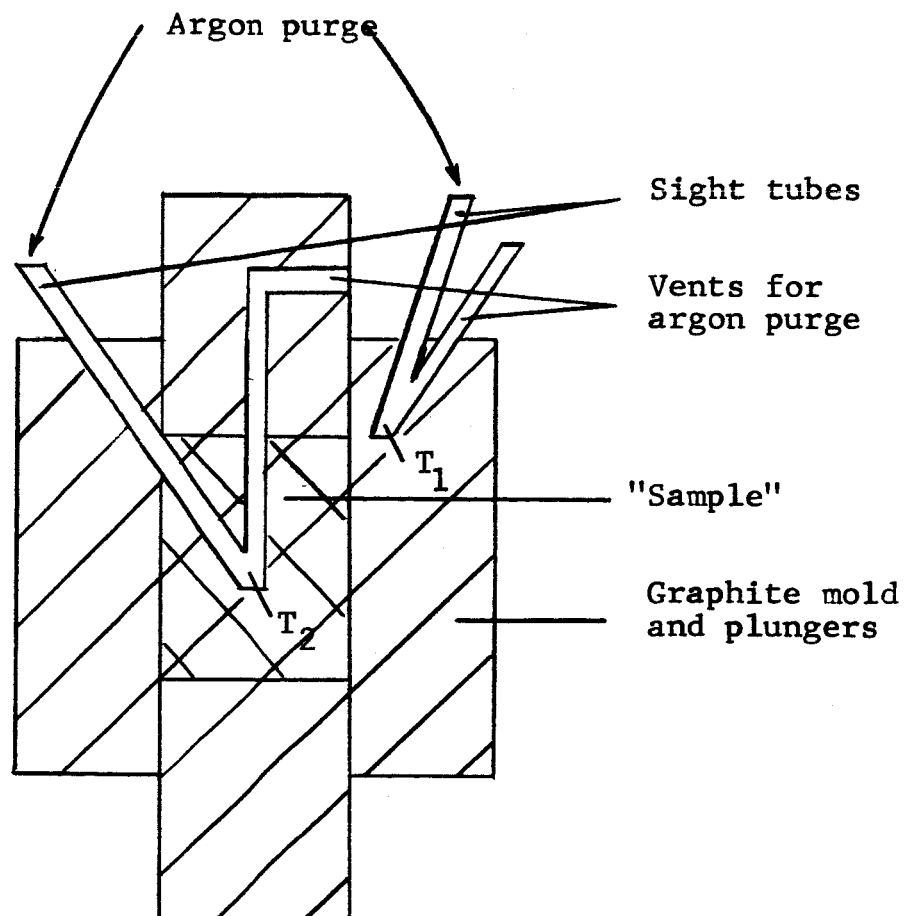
DIAGRAM OF MOLD ASSEMBLY FOR
